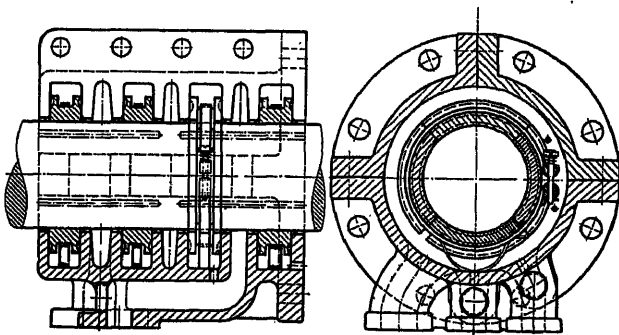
Amer. G.E.C., carbon ring-type packing gland
